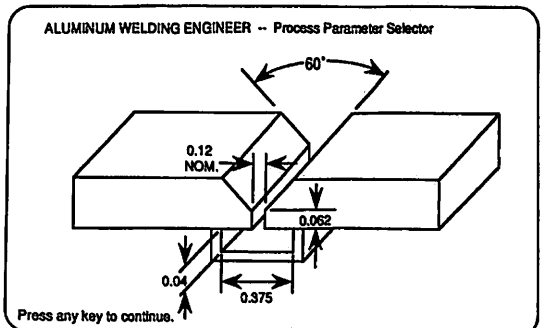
Screen output showing recommended single-V-groove joint design for GMA welding a 0.375-in.-thick plate.
